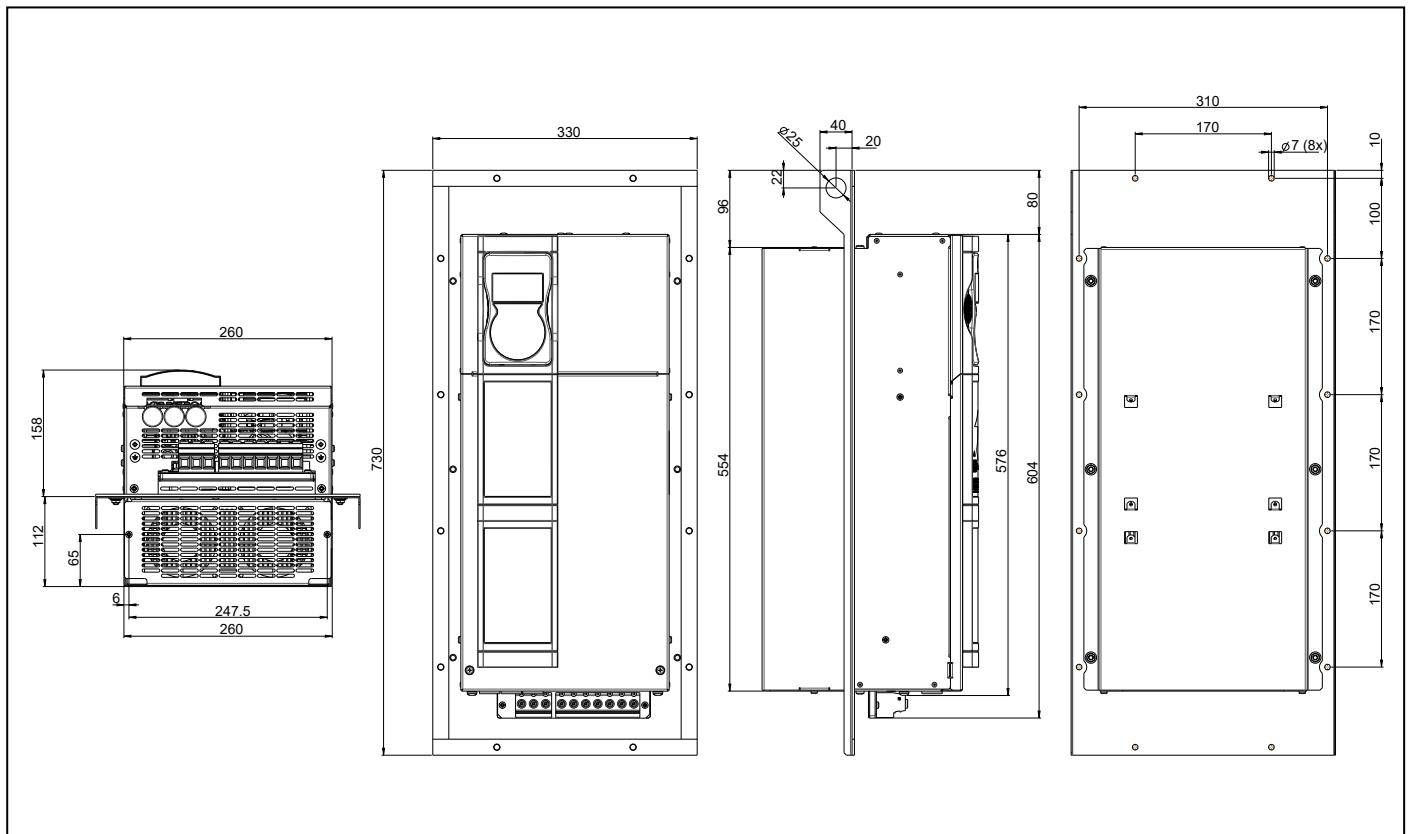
Size 4 ADV200 SP-EH-... dimensions
